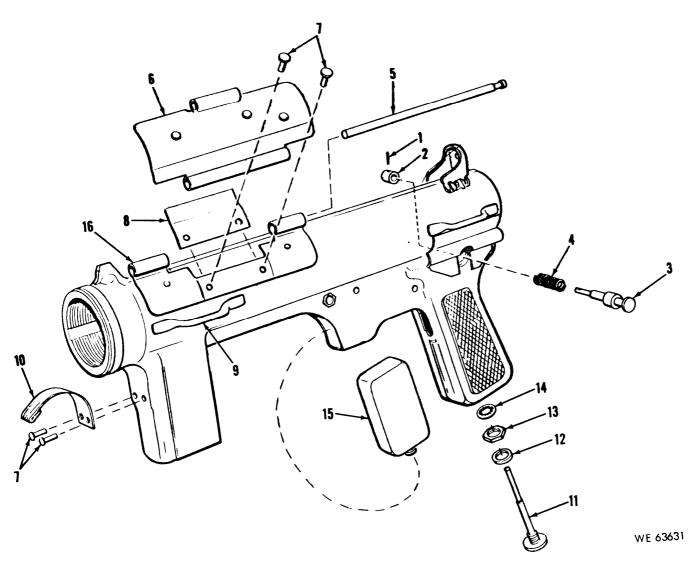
Receiver assembly, M3A1 only-exploded view.
